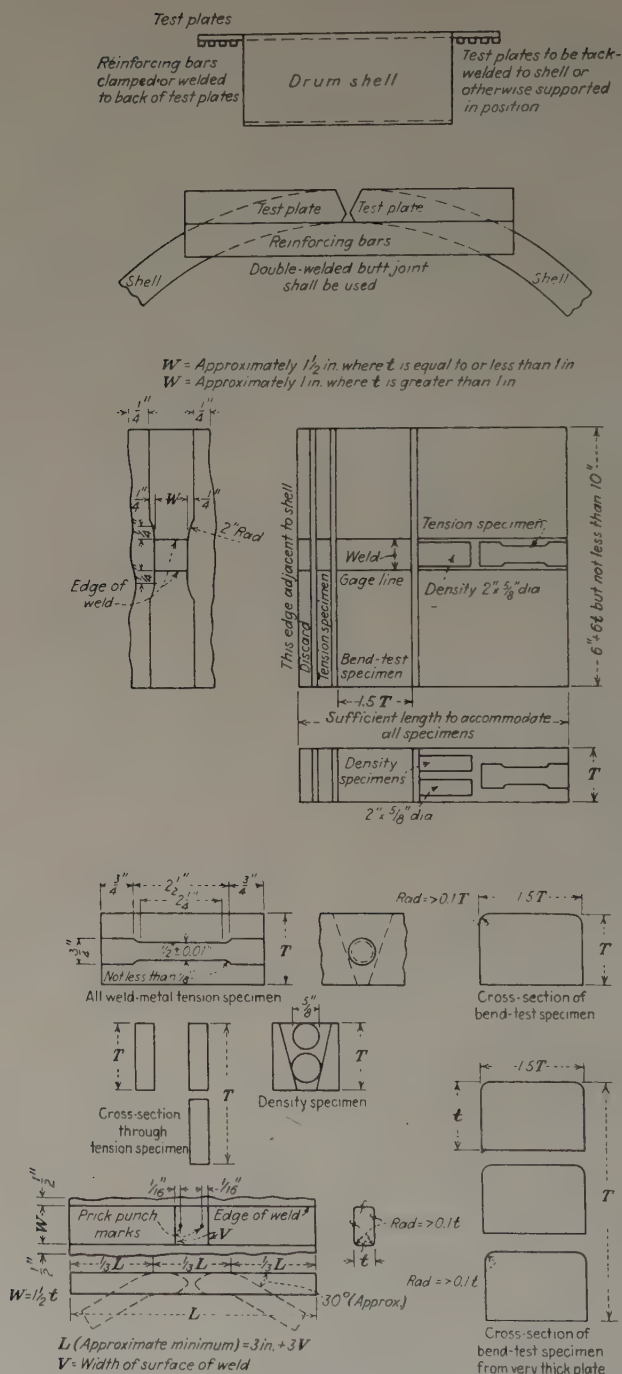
BOILER CODE REQUIREMENTS FOR CLASS I TEST PIECES.
